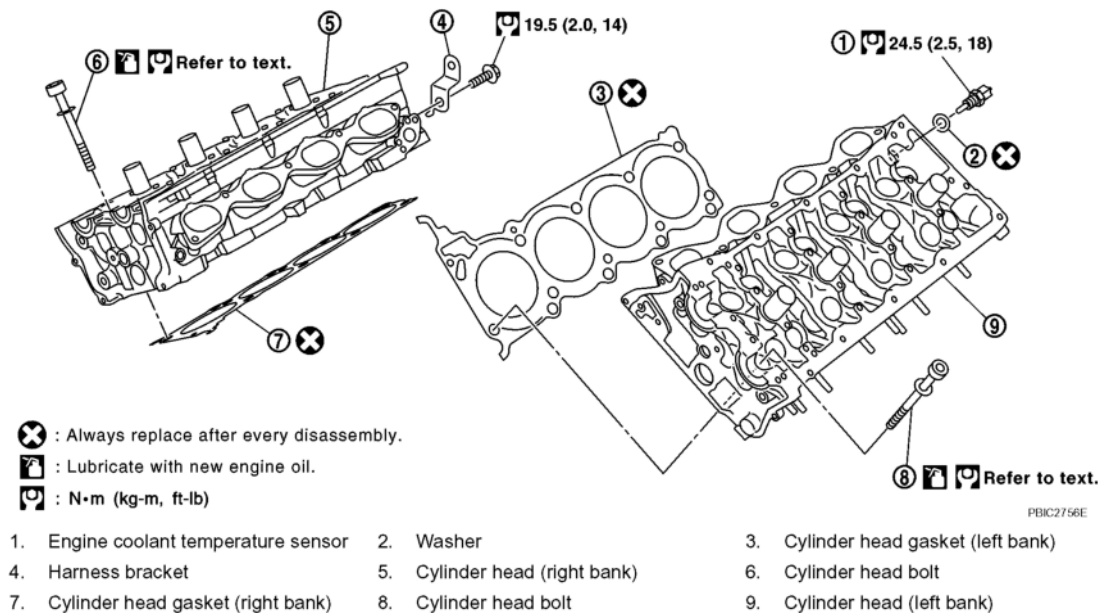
Identifying Cylinder Head Components With Torque Specifications
